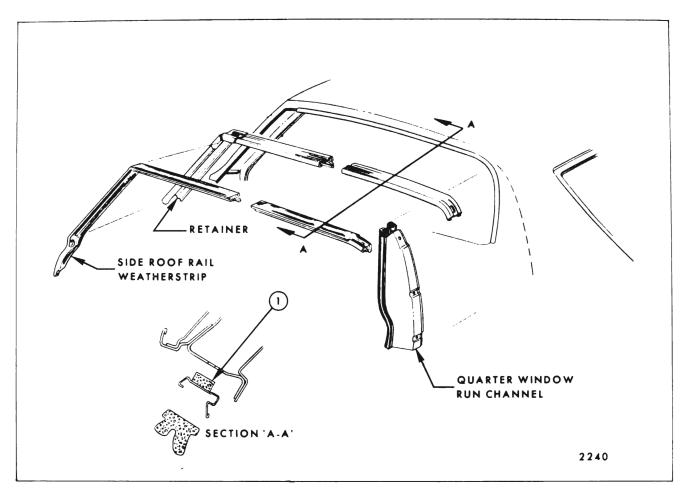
Side Roof Rail Weatherstrip & Retainer - "B & C-47" Styles
